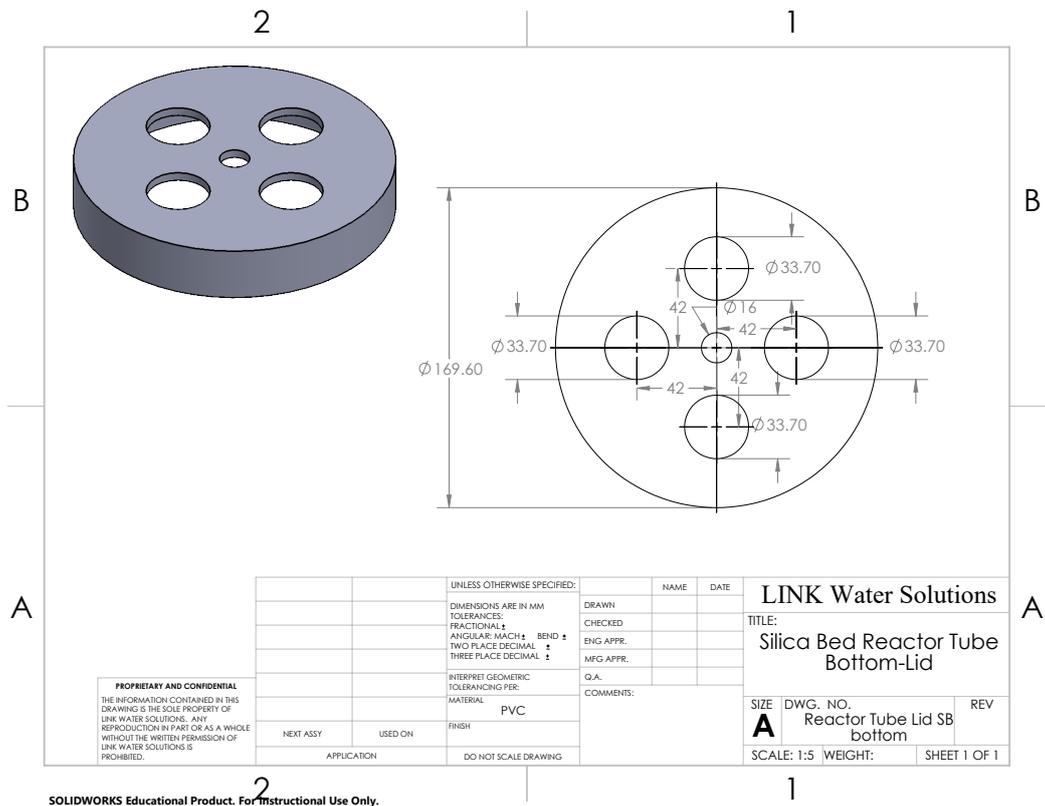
Technical drawing of the Silica Bed Tube bottom lid
